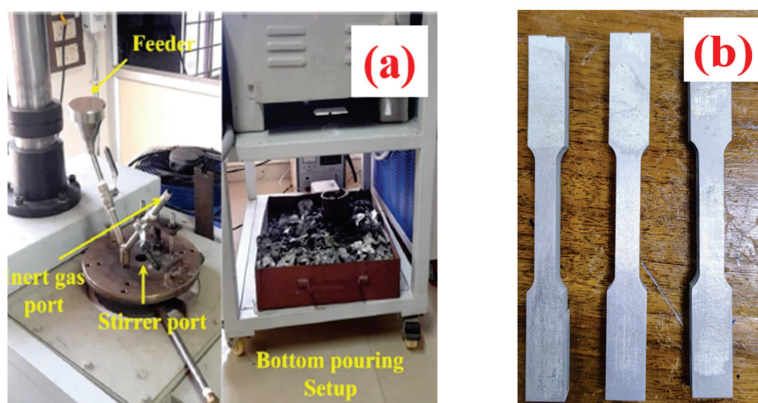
(a) Bottom pouring stir casting setup. (b) Fabricated tensile test specimens.
